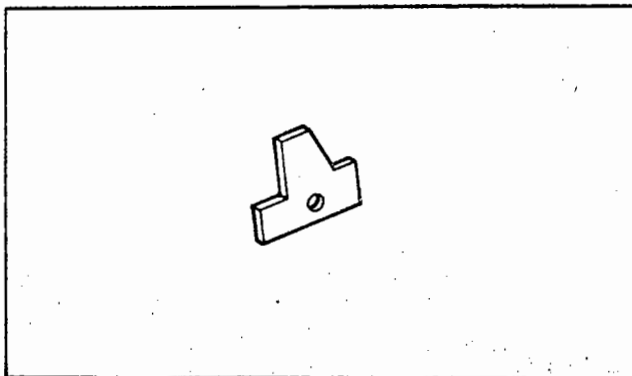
T25939 Enrichment Valve Screw Adjusting Assembly Gage
